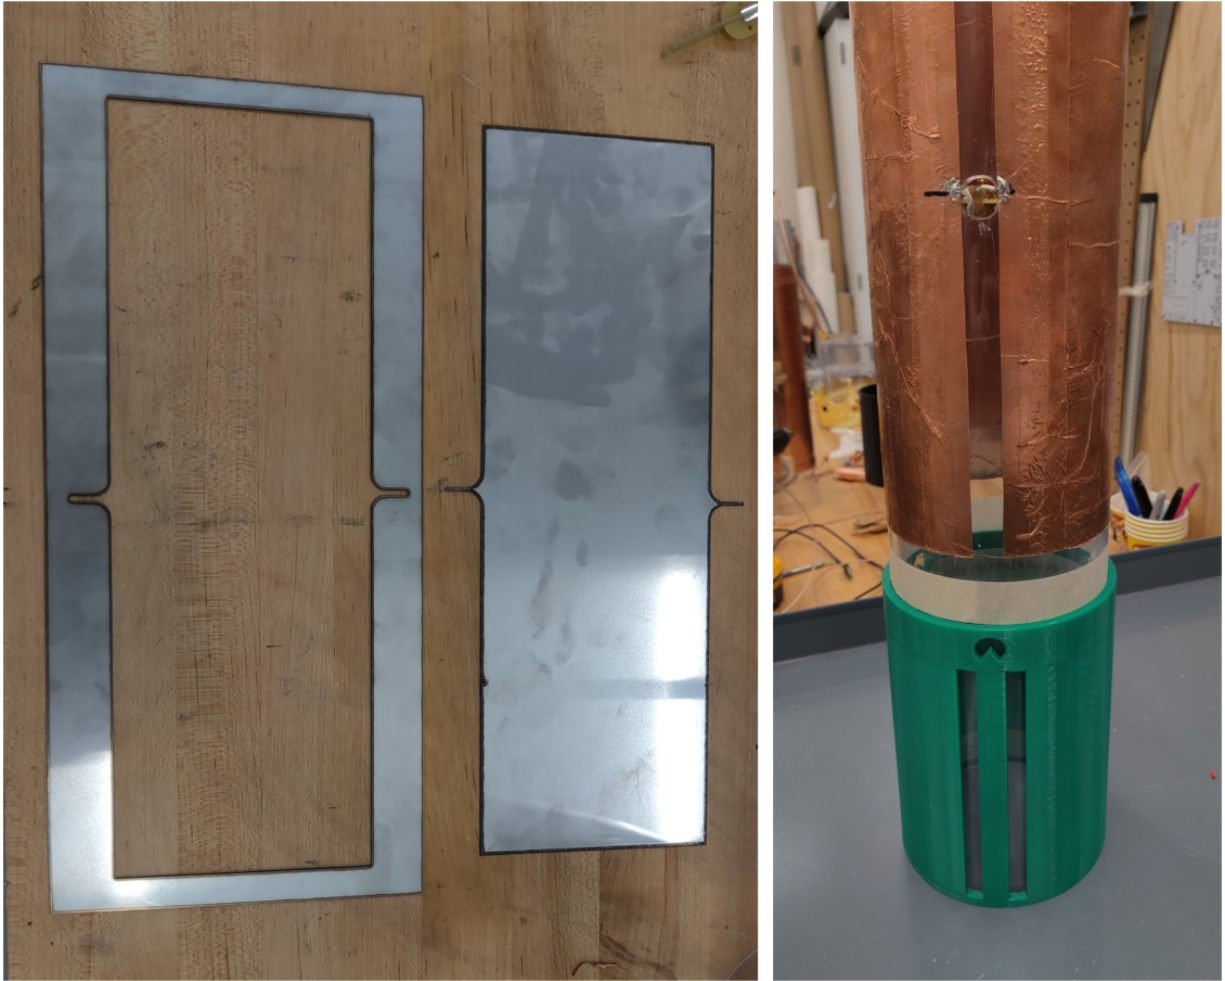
Left: The laser-cut stencil used for producing consistent copper panels. Right: The 3D printed stencil which provided guidelines for consistent panel placement and through-hole positioning.
